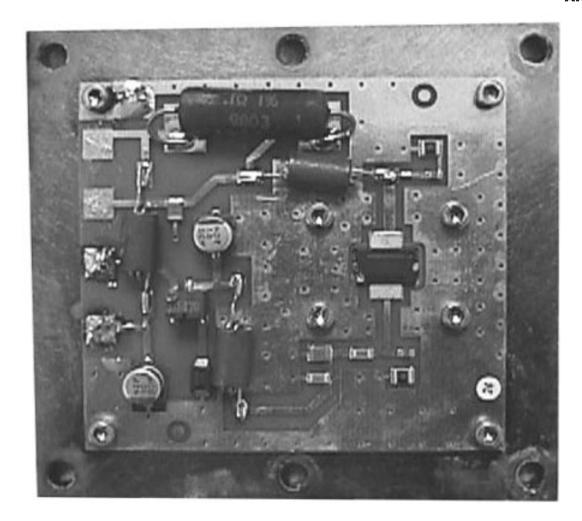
Complete PCB Assembly with TO-270 Device on a Cu Pallet
